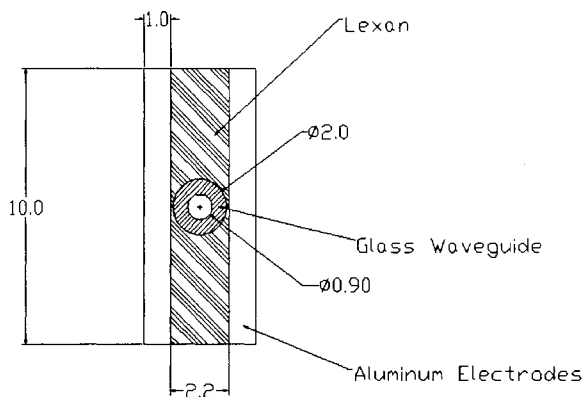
End view of 0.9-mm i.d. glass modulator. All dimensions are in millimeters.
